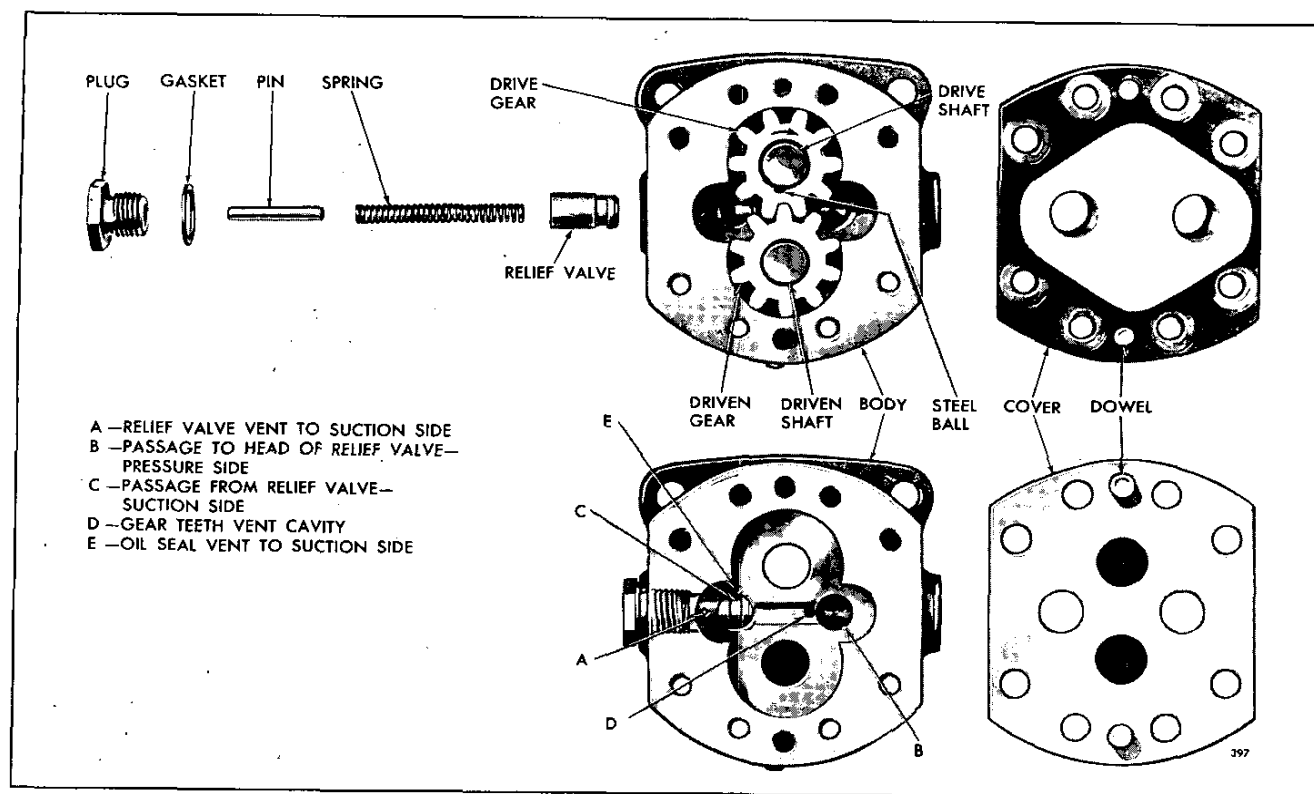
Fuel Pump Valving and Rotation (Right Hand Pump Shown)
